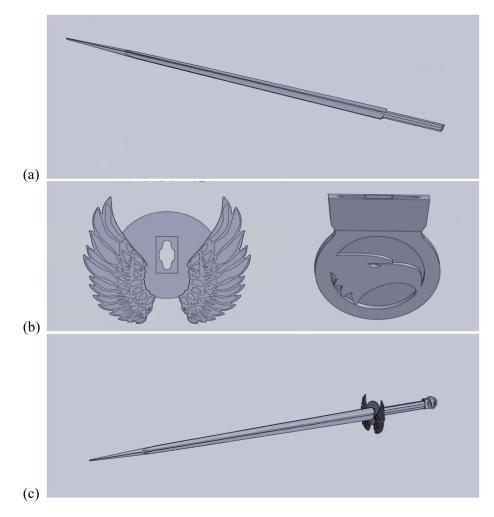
CAD model of the (a) sword blade, (b) crossguard, and pommel, (c) full sword assembly
